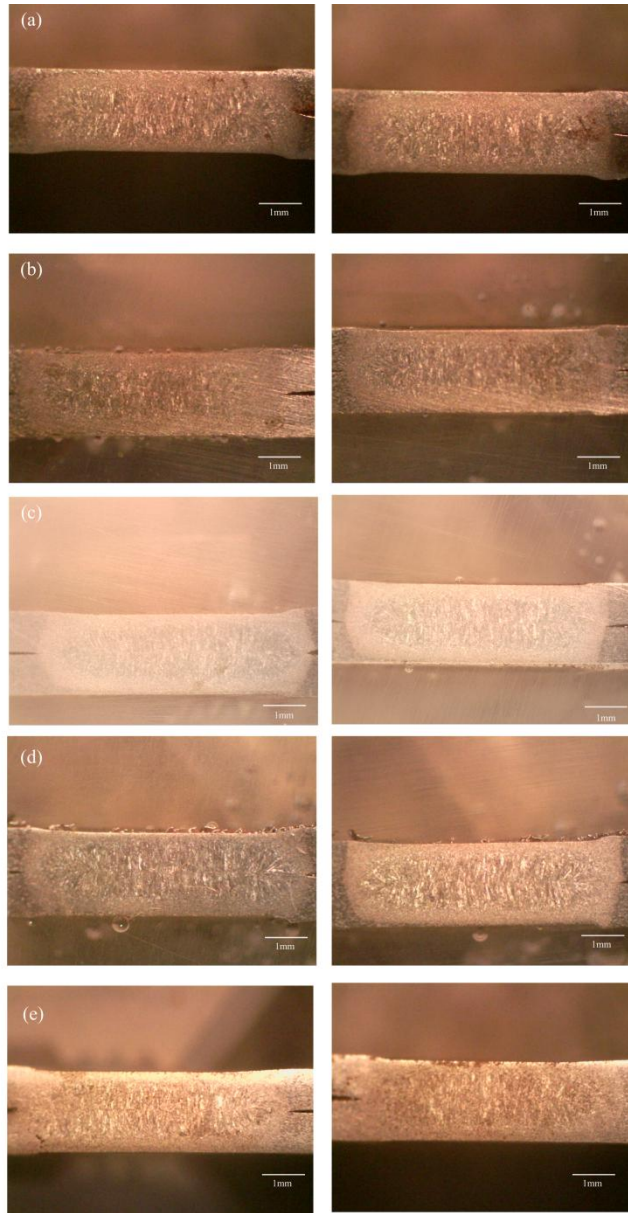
Longitudinal-sectional views of shunt welds and first single shunted welds. a) 8 mm. b) 12 mm. c) 15 mm. d) 24 mm. e) 30 mm
